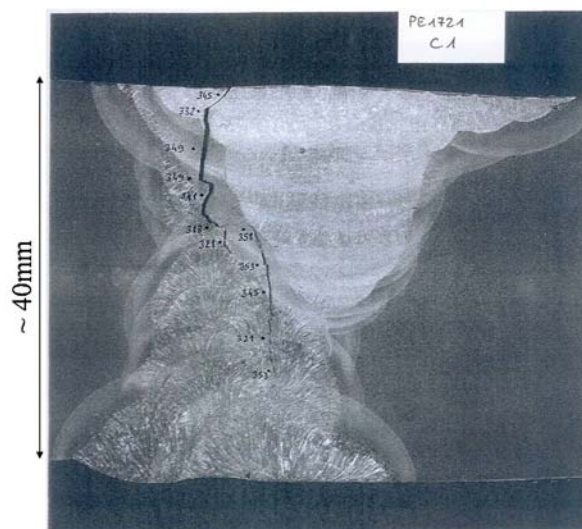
H-induced cold crack in S890 steel weld deposit [7].
